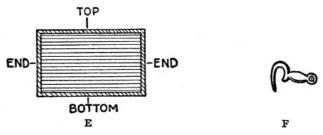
E, a cross section view of the box. F, detailed drawing of the hook
